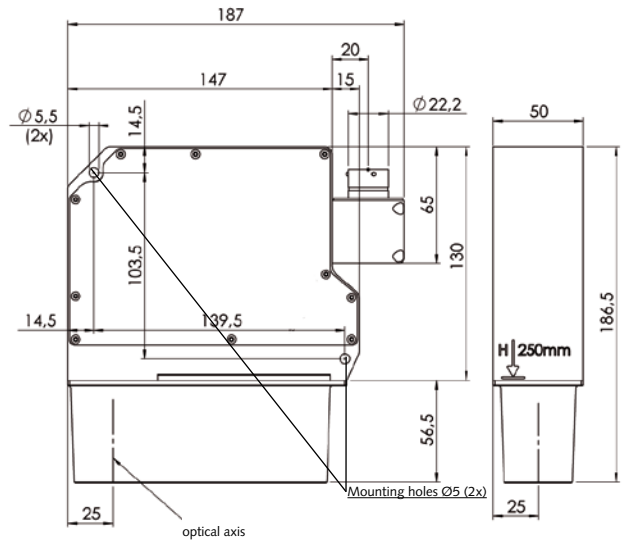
Dimensions Correvit® S-HR sensor with 90° connector
